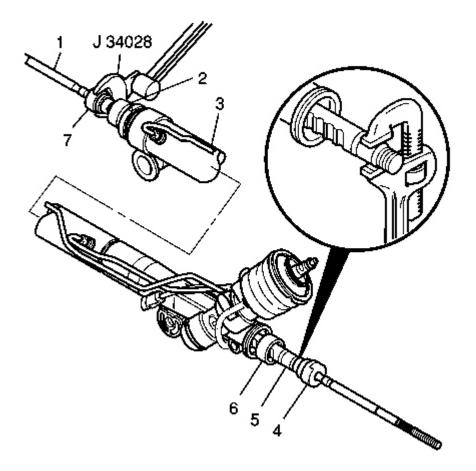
View of Shock Dampener, Female/Male Inner Tie Rod & Inner Tie Rod Housing Courtesy of GENERAL MOTORS CORP.
